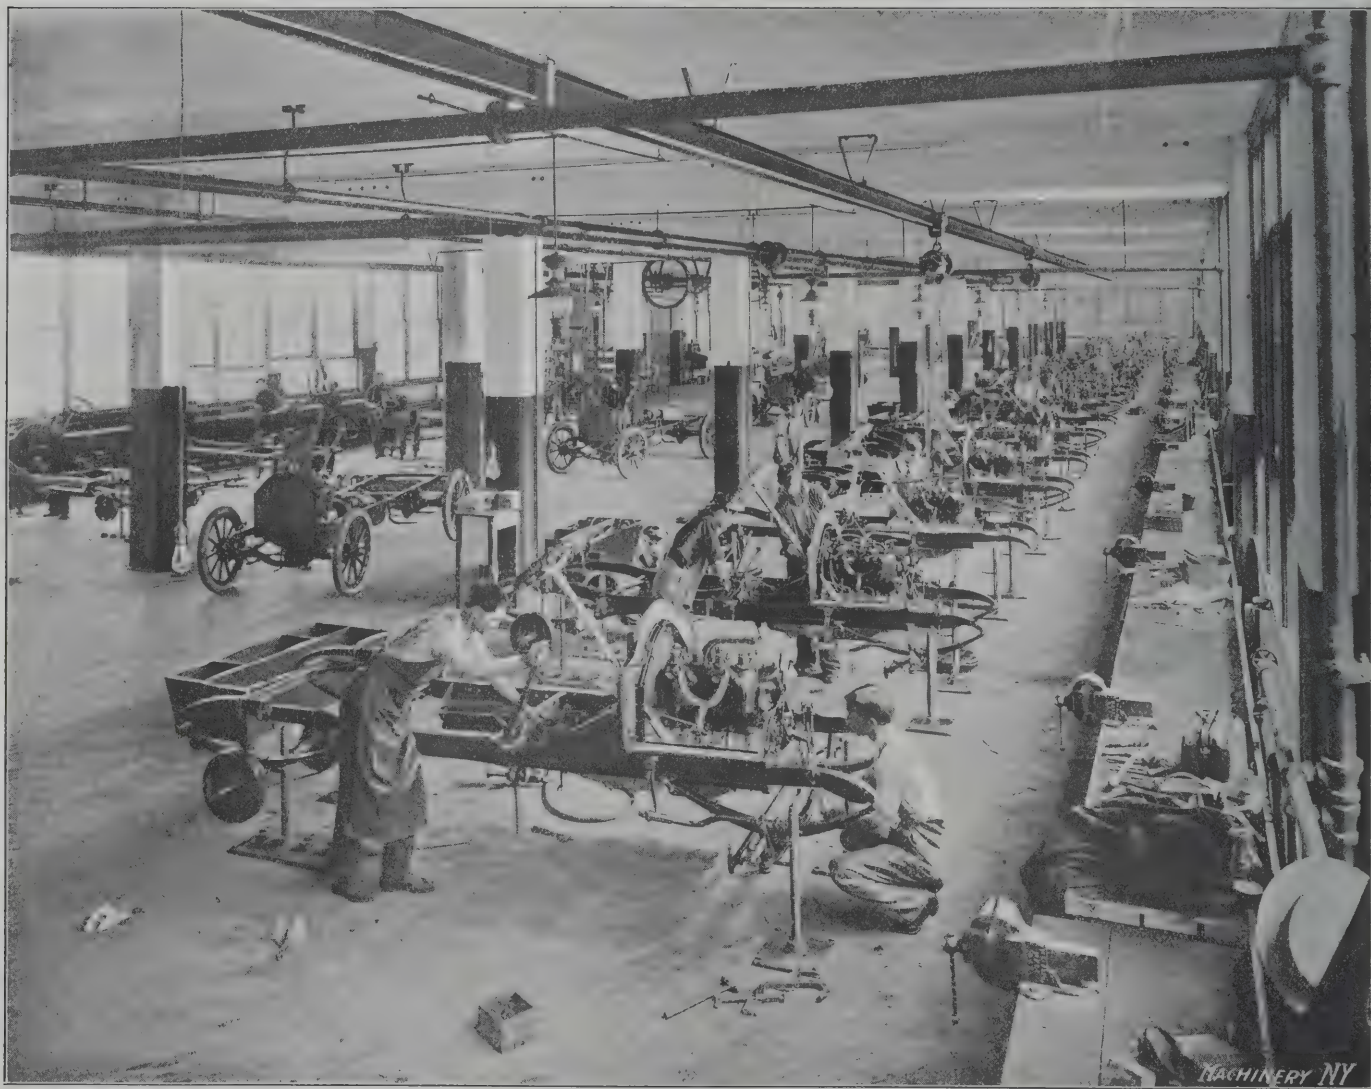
View of the Assembling Room, showing Arrangement of Overhead Track and Differential Hoists; the Trucks, each of which holds the Parts for Two Cars; and the Adjustable Frame Supports
